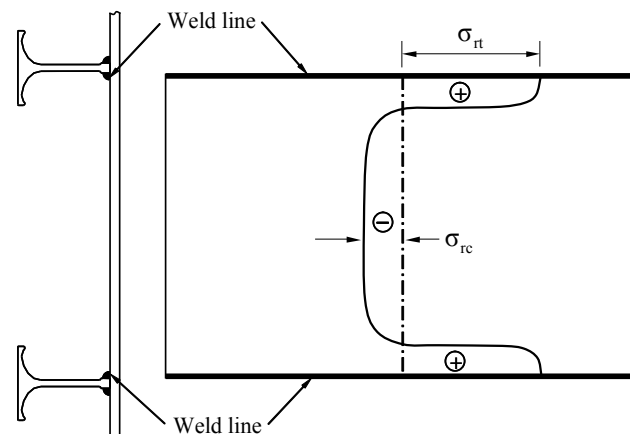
(a) Schematic of fillet weld-induced residual stresses in the plating
